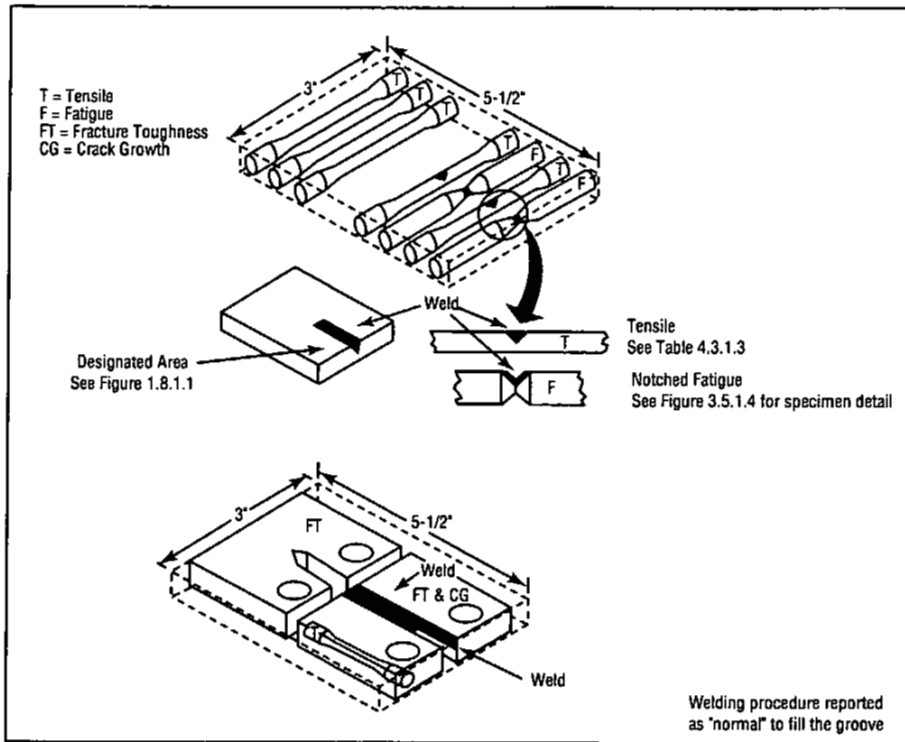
V-grooved (60-degree V, 0.25-inch deep with 3/32-inch radius) weld specimens from Northrop stepped plates (Ref. 12)
